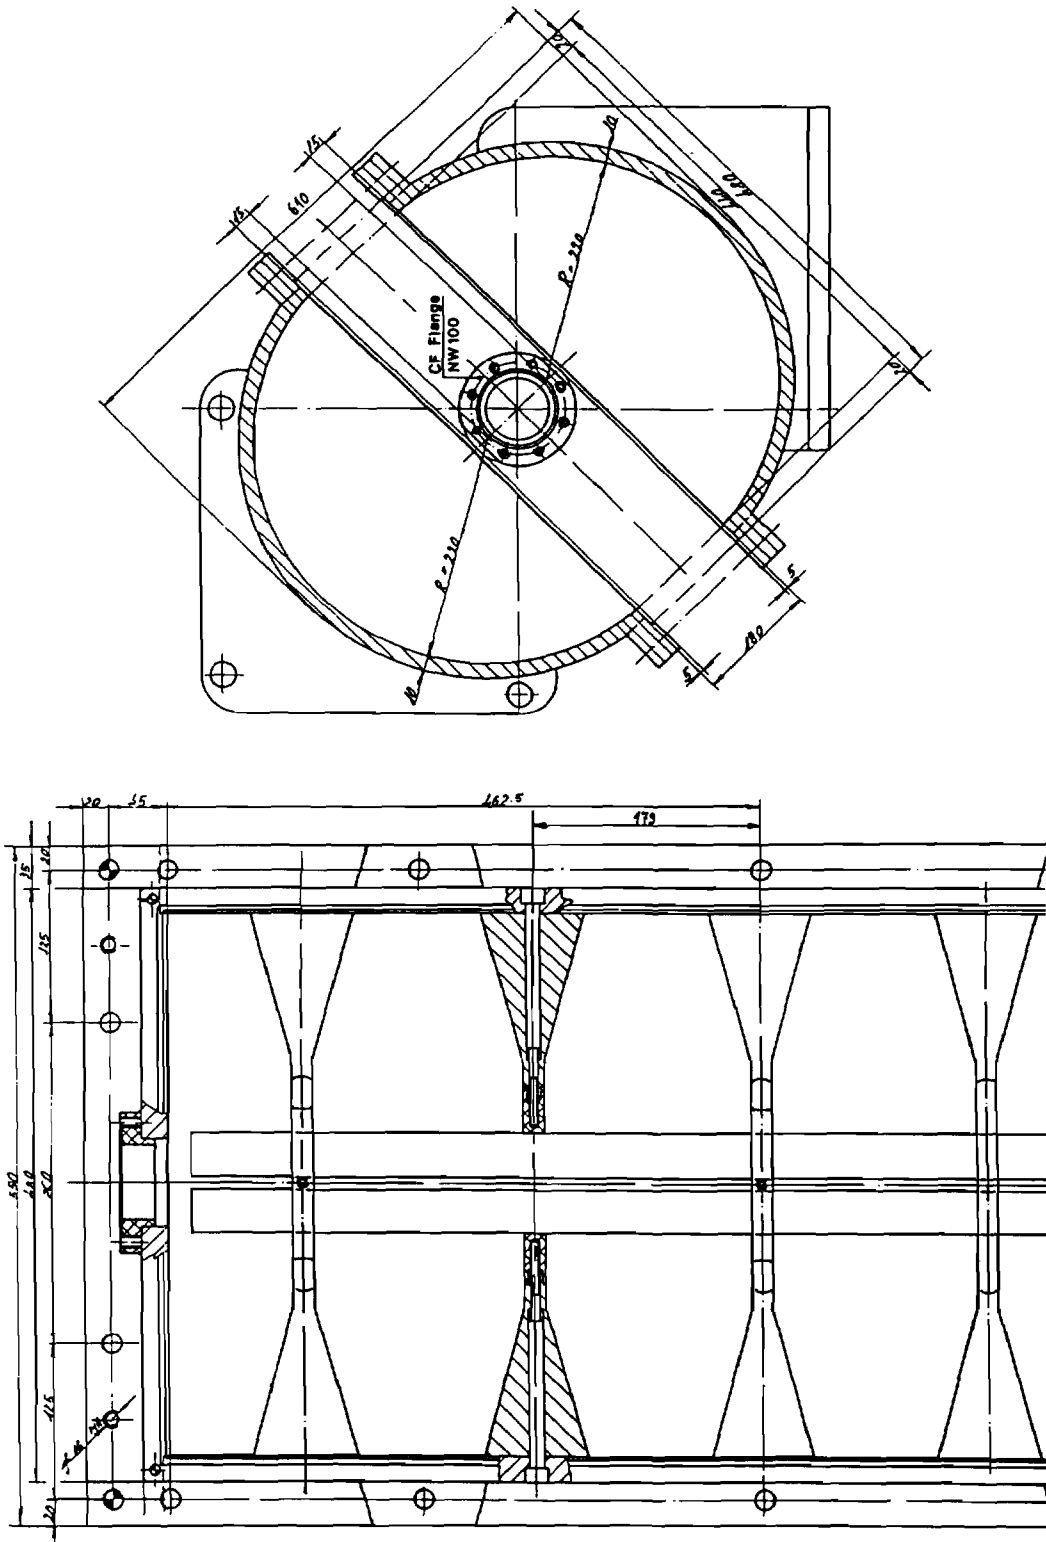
(b) Preliminary Design of RFQ: End View and Side View Cross- Sections
